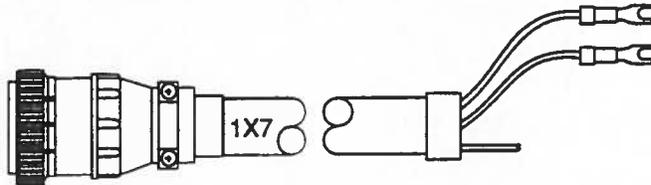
Machine I/O Interface Cable - PS to Machine Computer Interface
